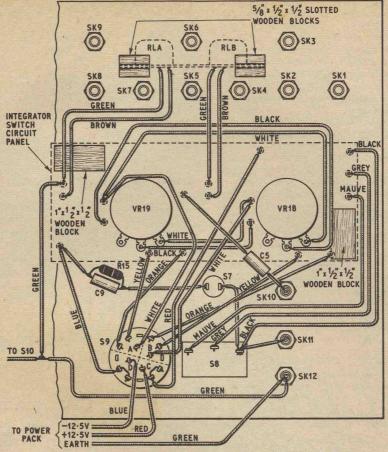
Rear view of UNIT "B" front panel showing integrator showing switch wiring
